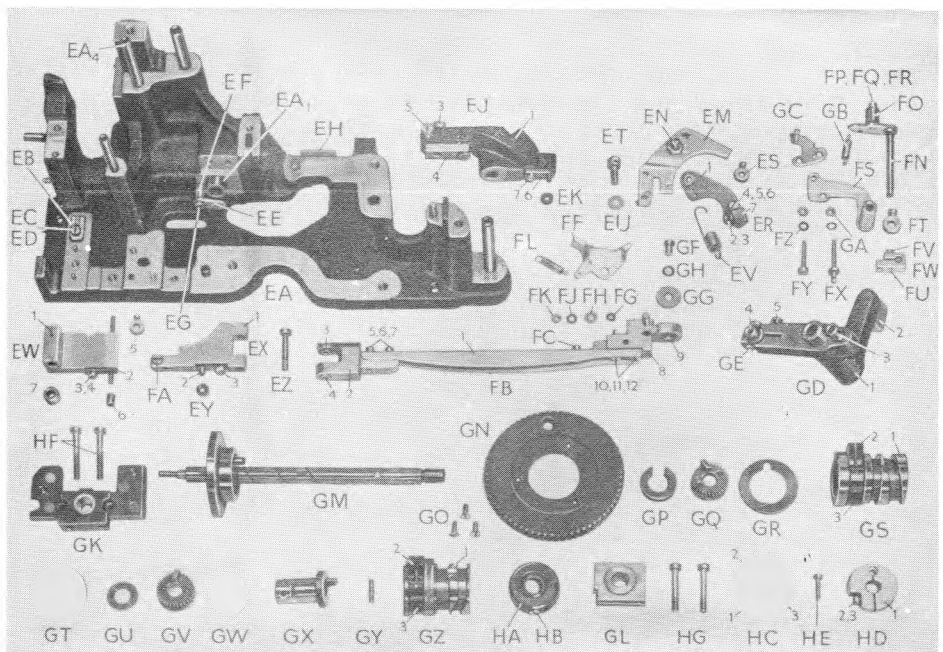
PARTIAL ASSEMBLY COMPONENTS.
